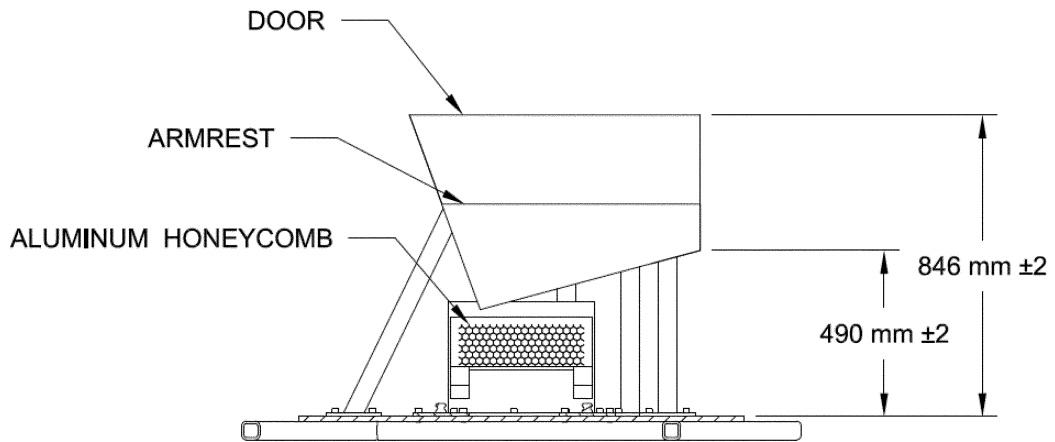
C to § 571.213a. Side Impact Seat Assembly Frontal View
